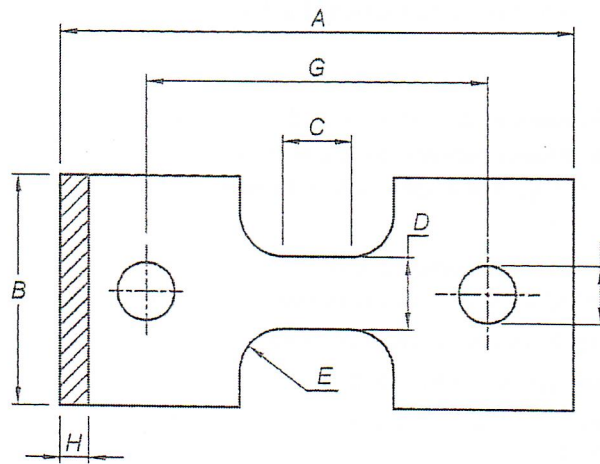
MACHINE TYPE B TENSILE TEST PIECE (FOR $E \geq 25$ mm)
